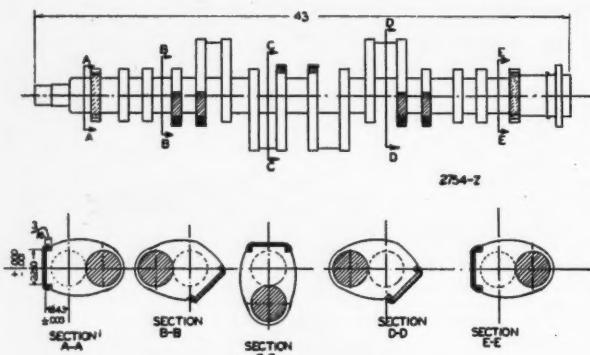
Drawing of eight-cylinder engine crankshaft.
